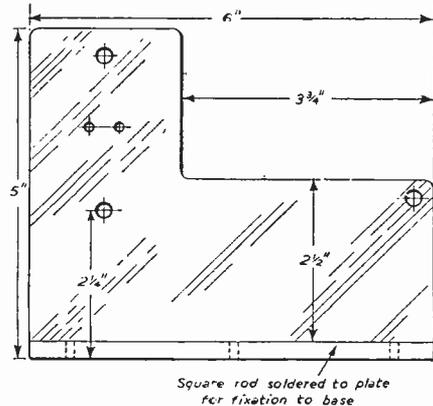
Shape and sizes of the sideplates. Two are required.
